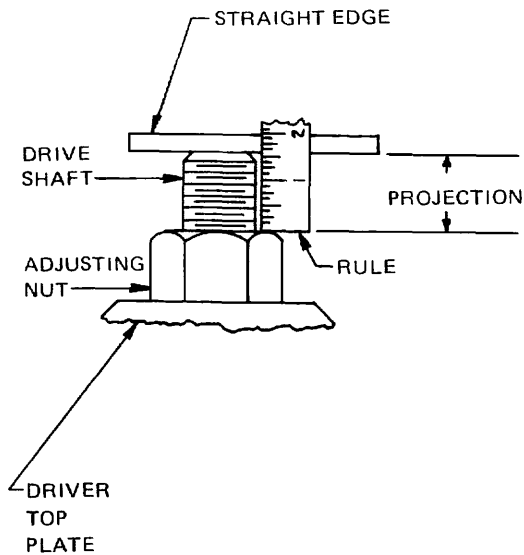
MEASURING PROJECTION OF DRIVE SHAFT.
